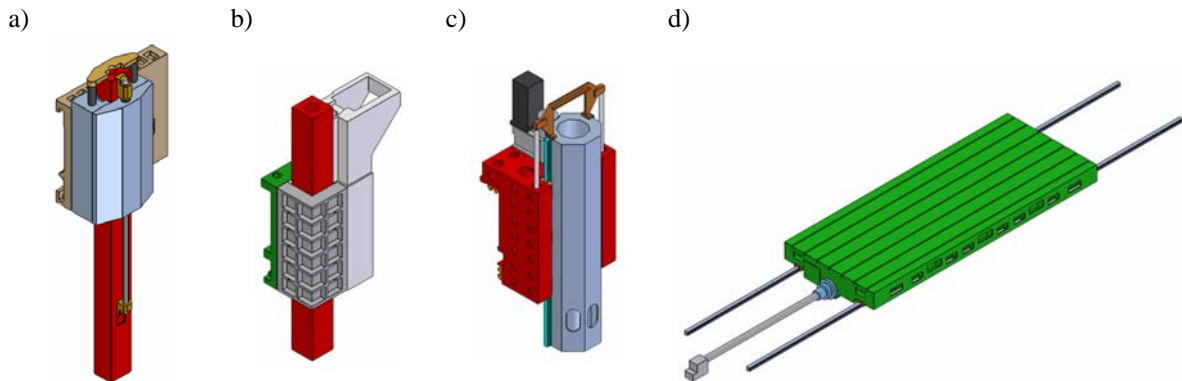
The movable subassemblies of heavy machine tools: a) the saddle of vertical lathe KDC [3], b) the saddle of vertical lathe KCI type[2], c) the saddle of planer mill HSM 180 to high speed machining [1], d) the table of planer mill HSM 180 [1]
